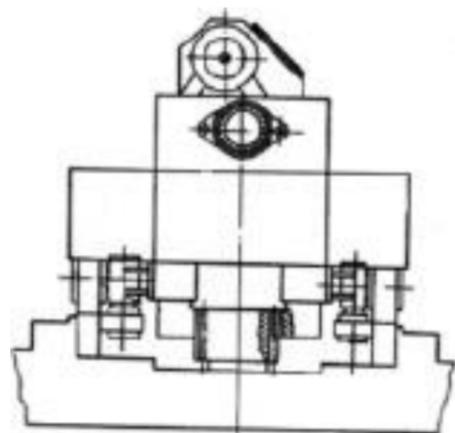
Cutting machine for cutting continuously moving pipes on dimensional blank
